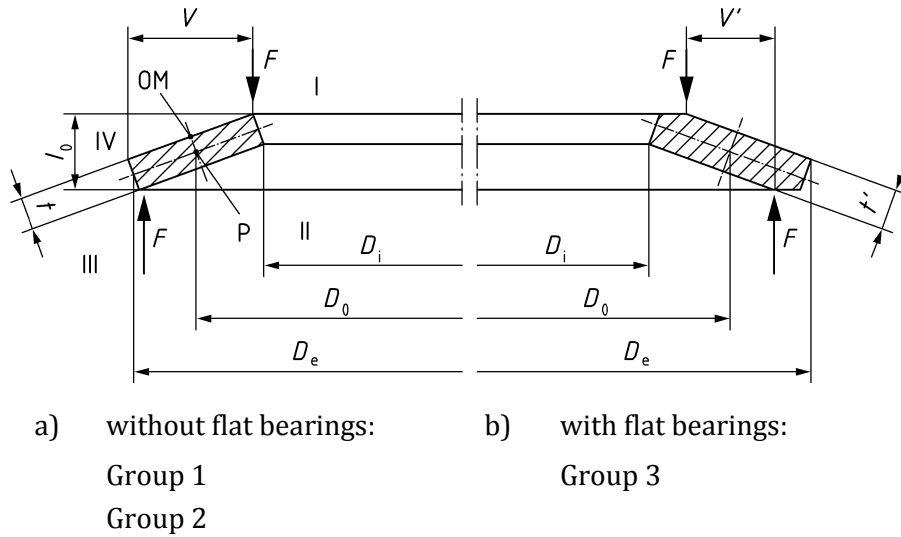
Single disc spring of group 1, 2 or 3 (sectional view), including the relevant points of loading
